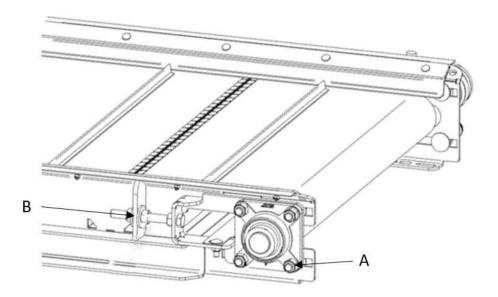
Adjusting the Horizontal or Inclined Conveyor Belt Tension
